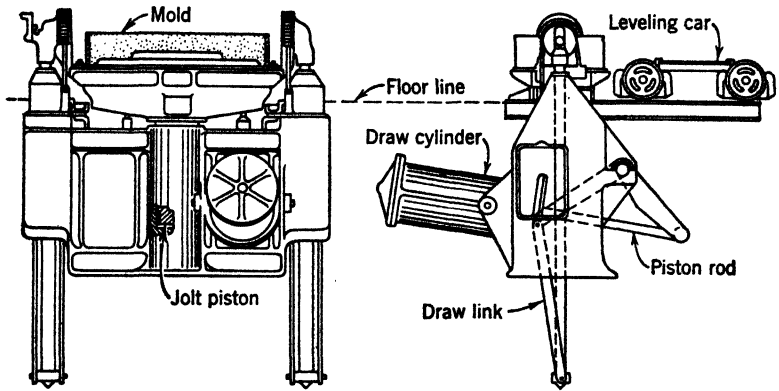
A. Mold has been jolted and struck off. The next step is to clamp the bottom board to the roll-over table, and the mold is rolled over. (Reproduced from print belonging to Osborn Manufacturing Co., Cleveland, Ohio.)
